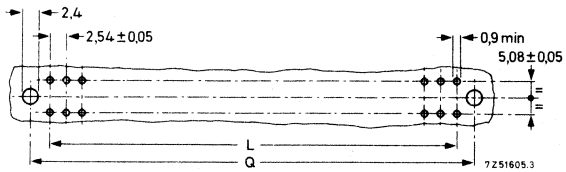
Hole pattern for board mounting of male parts; see Table 4 for dimensions L and Q.
